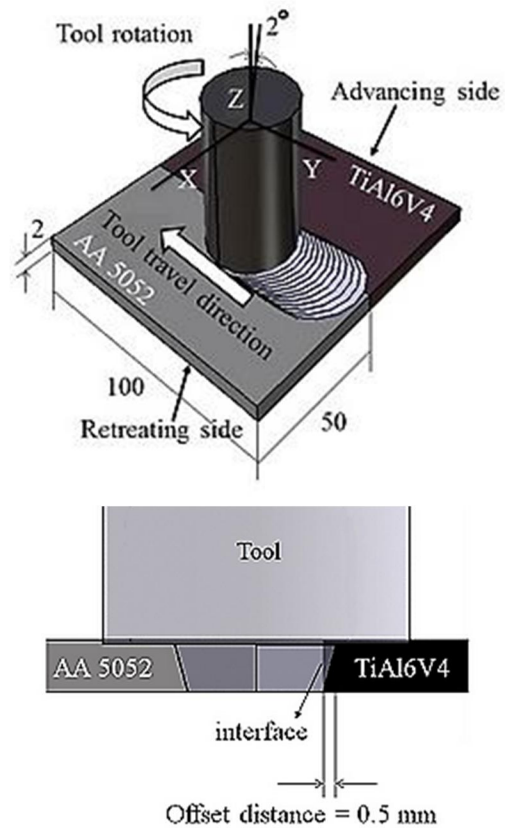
Schematic illustration of friction stir butt welding
